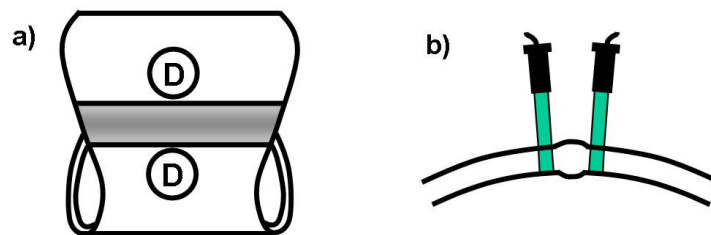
Lamination Testing within heat-affected zone. a) Top view of probe pair position with respect to weld, b) cross-sectional view of probe pair and pipe.
